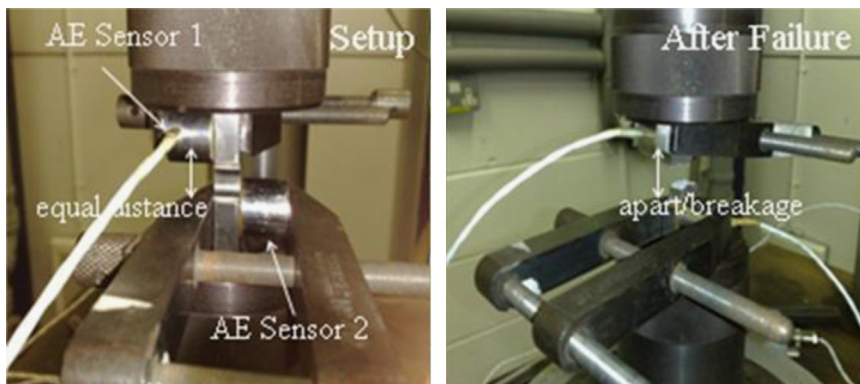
Tensile tests for AE vs. force using both non/machined super alloy workpieces.
